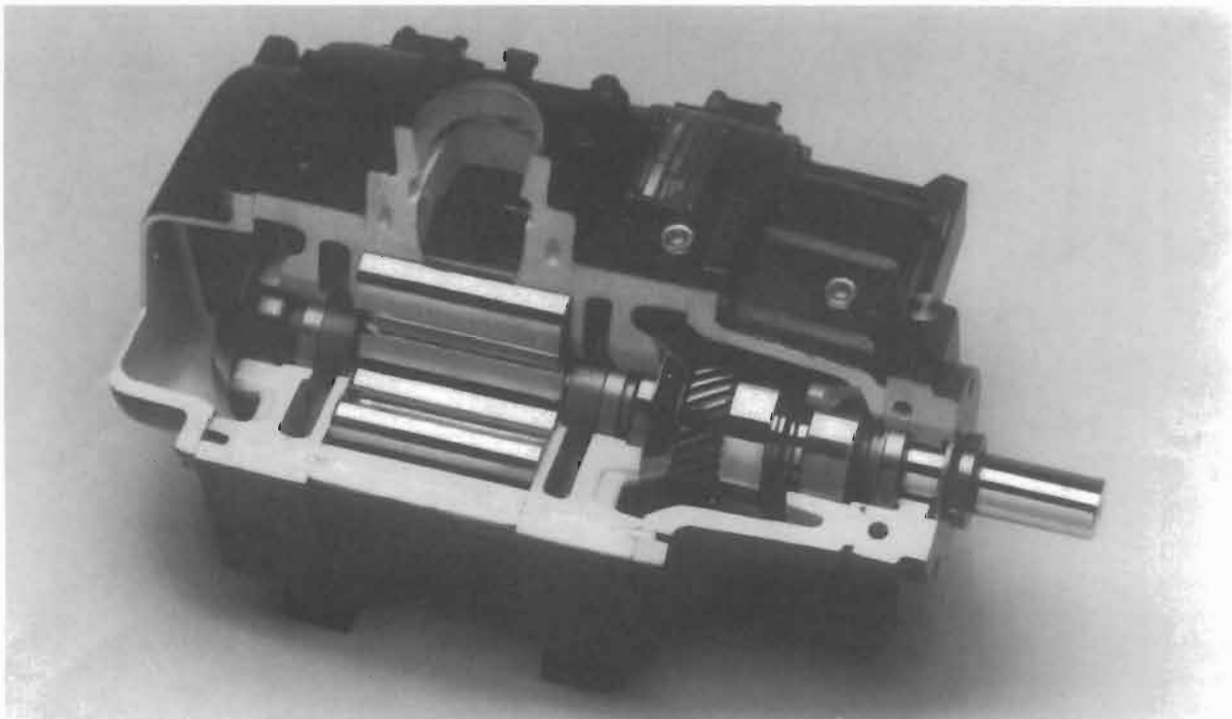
Cut-away view of internal assembly of rotary lobe vacuum pump. By permission, Tuthill Corp., M.D. Pneumatics Division.
